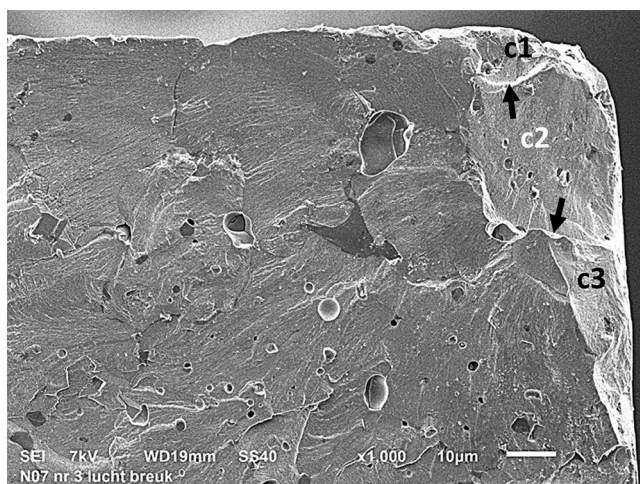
Fracture origin of specimen ruptured under 350 MPa in air at room temperature. Cracks c1, c2 and c3 are due to cutting; arrows indicate cracks perpendicular to the fracture surface, formed by joining of the c-cracks
